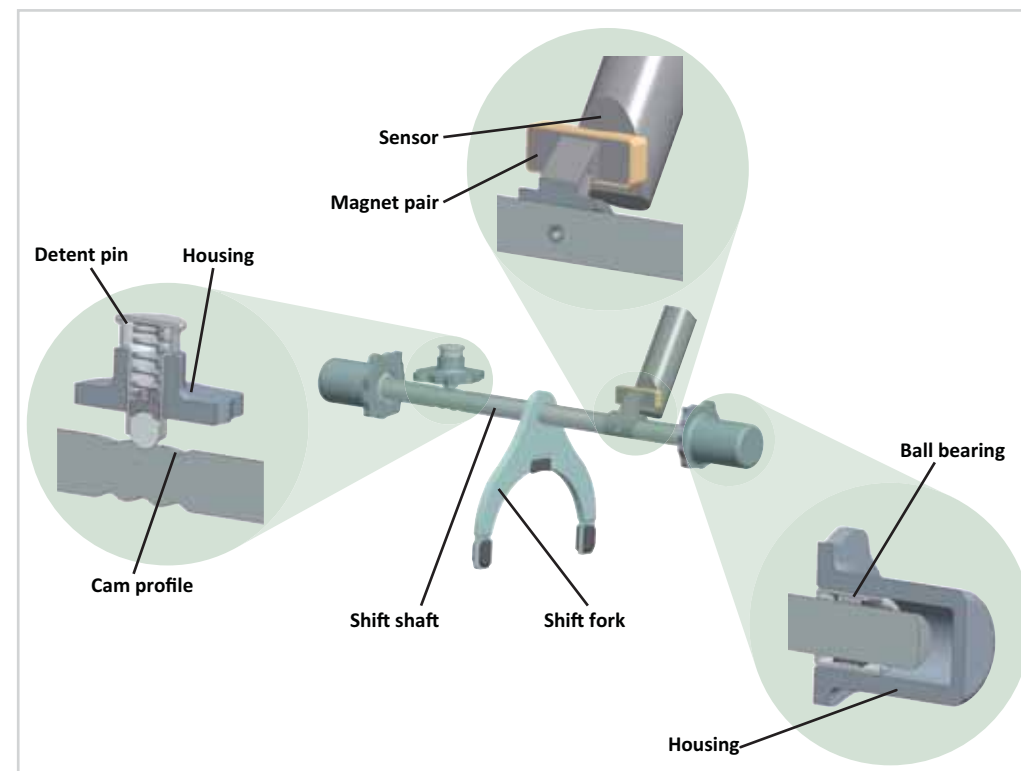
A typical gearshift fork design with bearing supports, detent cam profile and magnet retaining element
